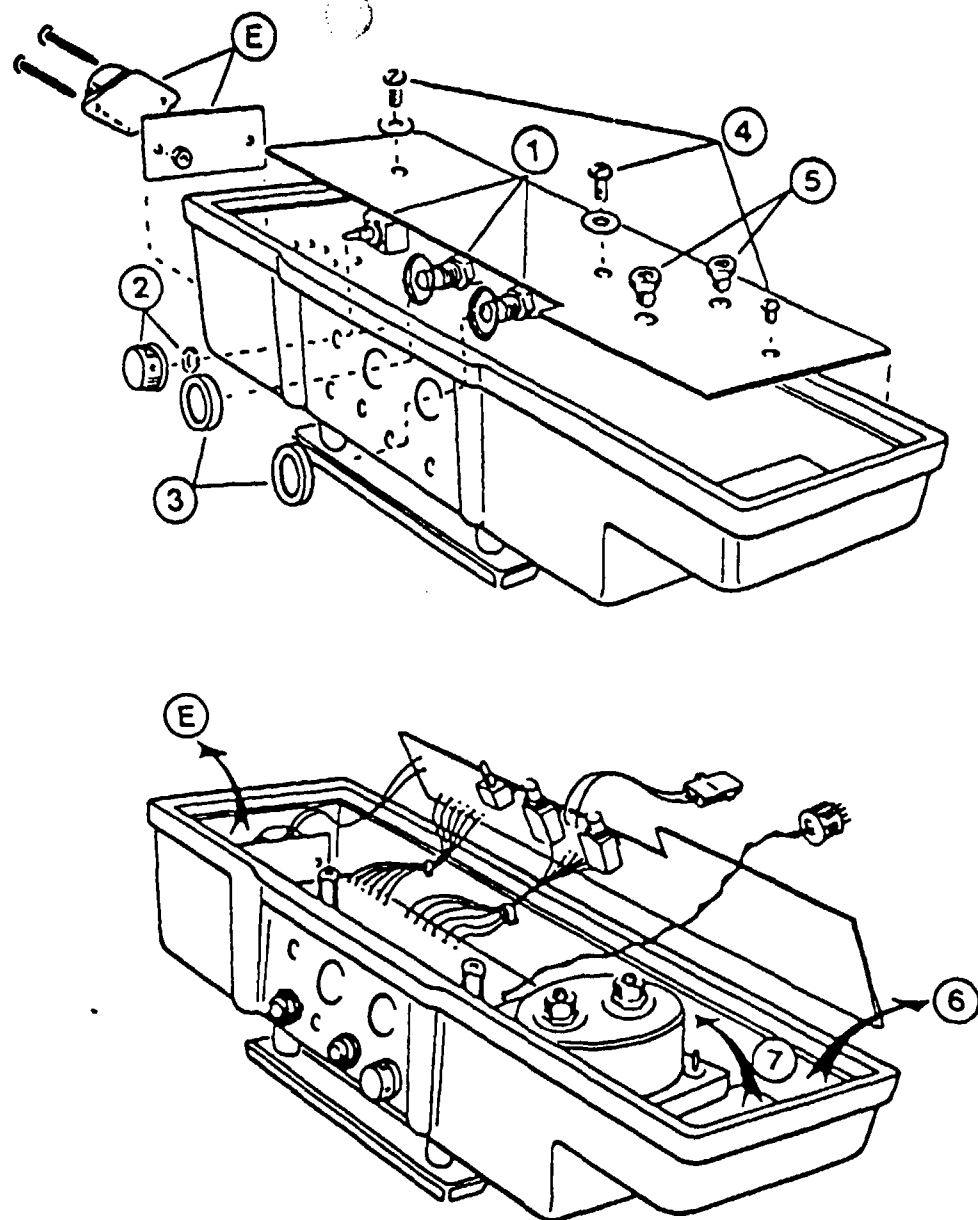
METER, BUZZER AND CIRCUIT BOARD REMOVAL / REPLACEMENT
